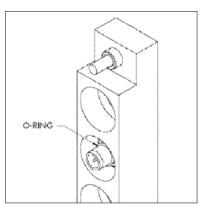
Figure B. The O-ring provides a bulkhead seal during receiver and ITA engagement.
